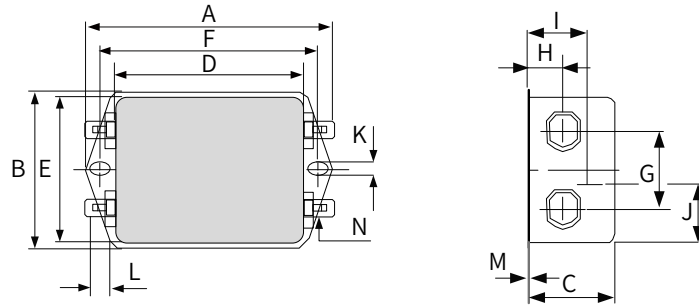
Dimension drawing of FN 2090 series filters (unit: mm)
